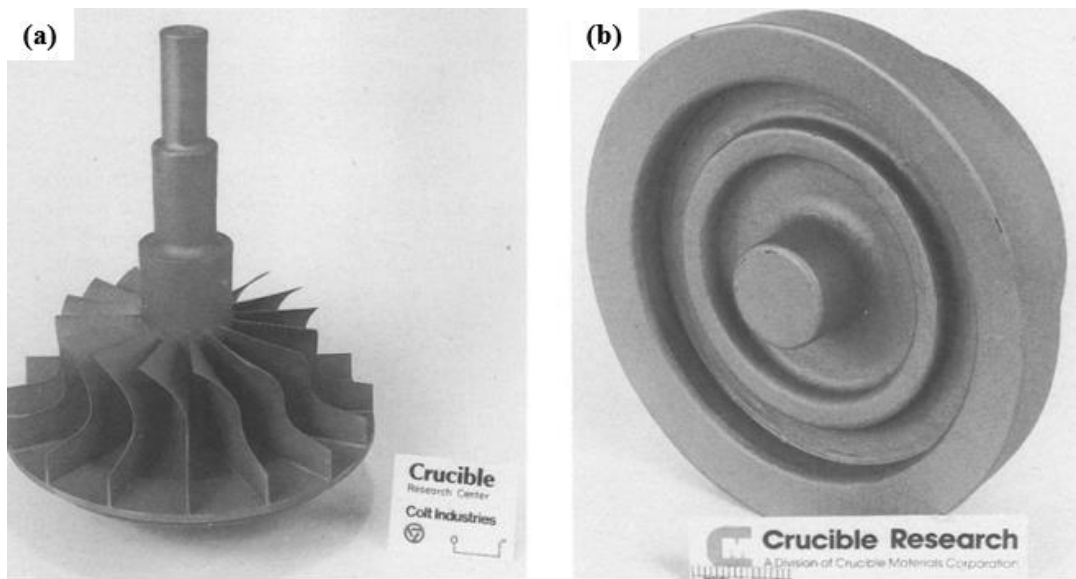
HIP produced; (a) turbine engine compressor rotor and (b) machining preform [159].
